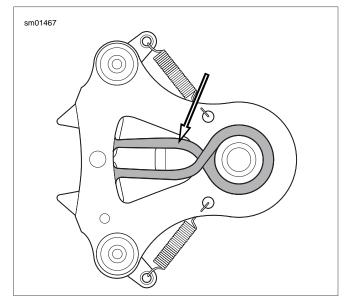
Shifter Shaft Return Spring (Correctly Installed)
